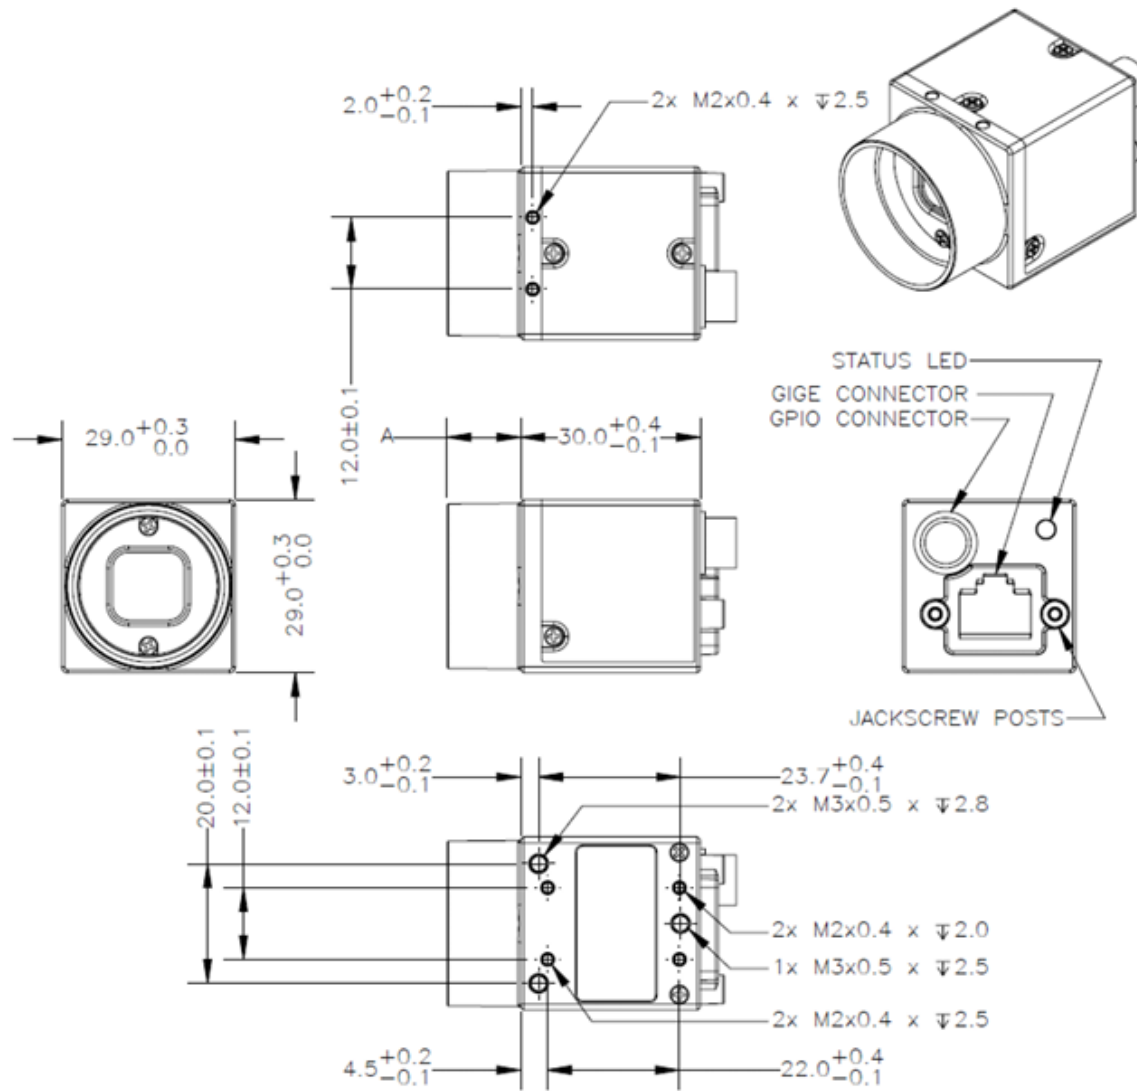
Footprint and Mount points for FLIR Blackfly S Family of Cameras
